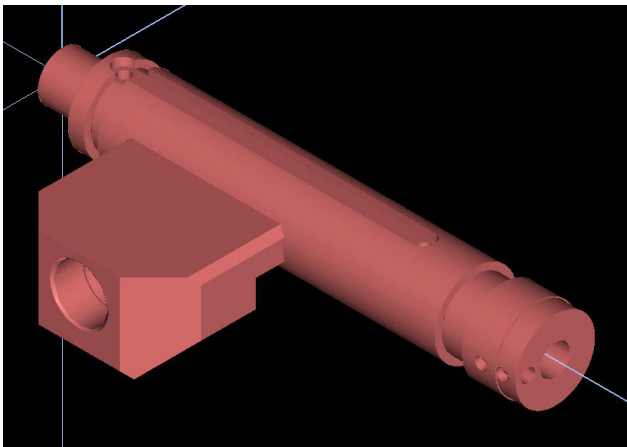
An LN₂ cooled rf coupler for the SCB cryomodule, machined from a solid piece of copper.
